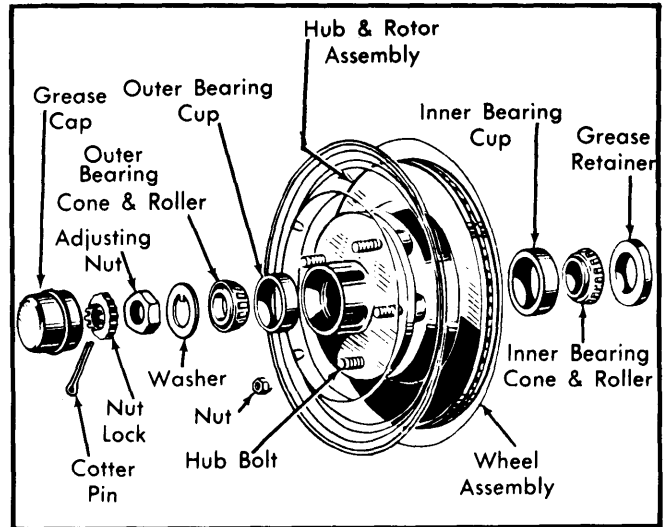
Exploded View of Wheel Bearing Components with Disc Brakes
